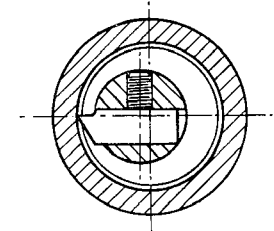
Internal Screwing Tool, showing need for increased front clearance
